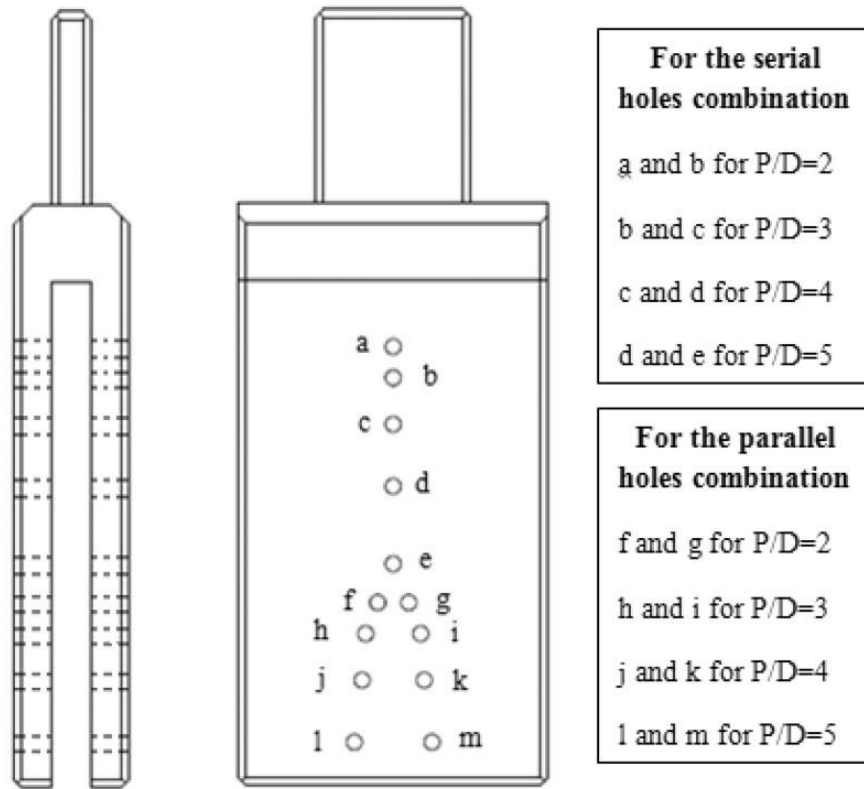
Basic shape of the fixture used for tested serial and parallel hole configurations
